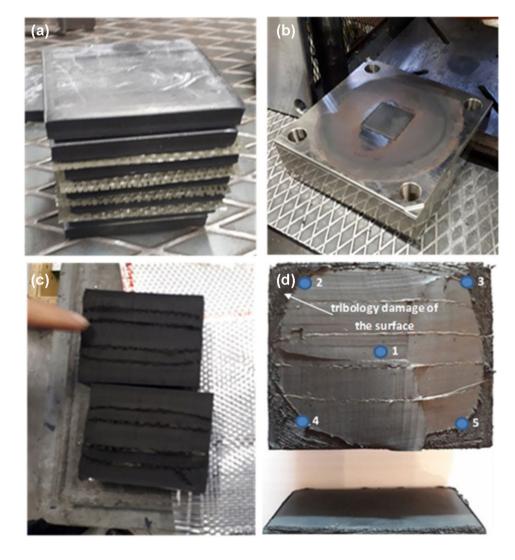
a un-vulcanized pads to insert in the mold; b steel mold designed to produce seismic isolator prototypes with 75 mm edge length; c first samples produced and cut in the middle (central, top and bottom pads are thicker on purpose); and d points where the hardness is measured on the vertical central cut section
